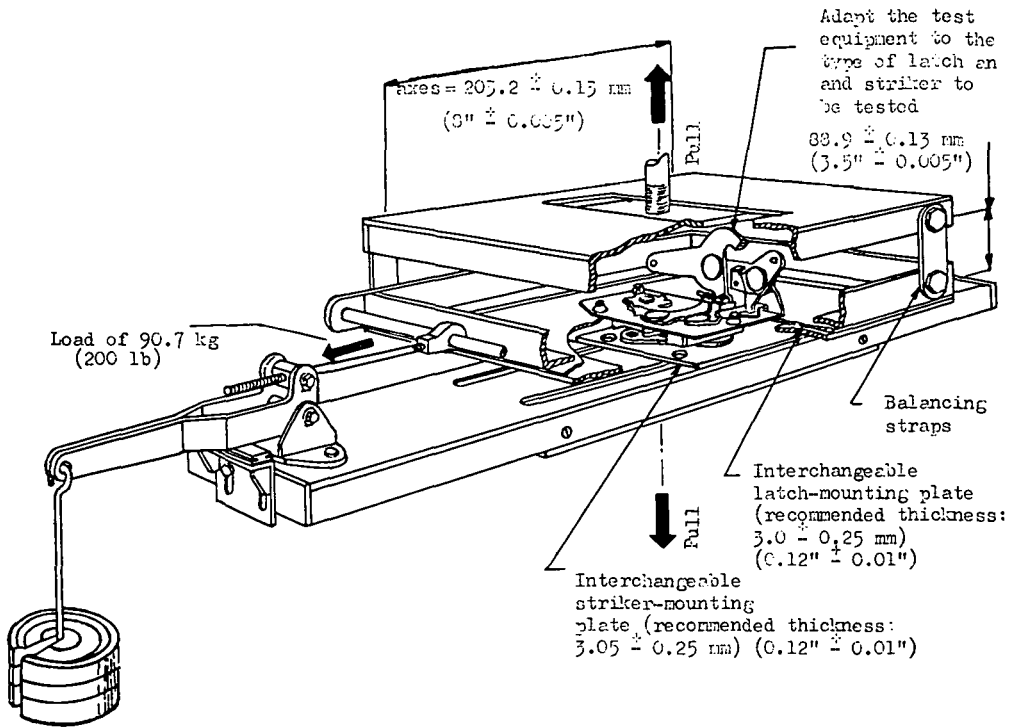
DOOR LATCH—TEST EQUIPMENT UNDER STATIC LOAD (TRANSVERSE LOAD)
